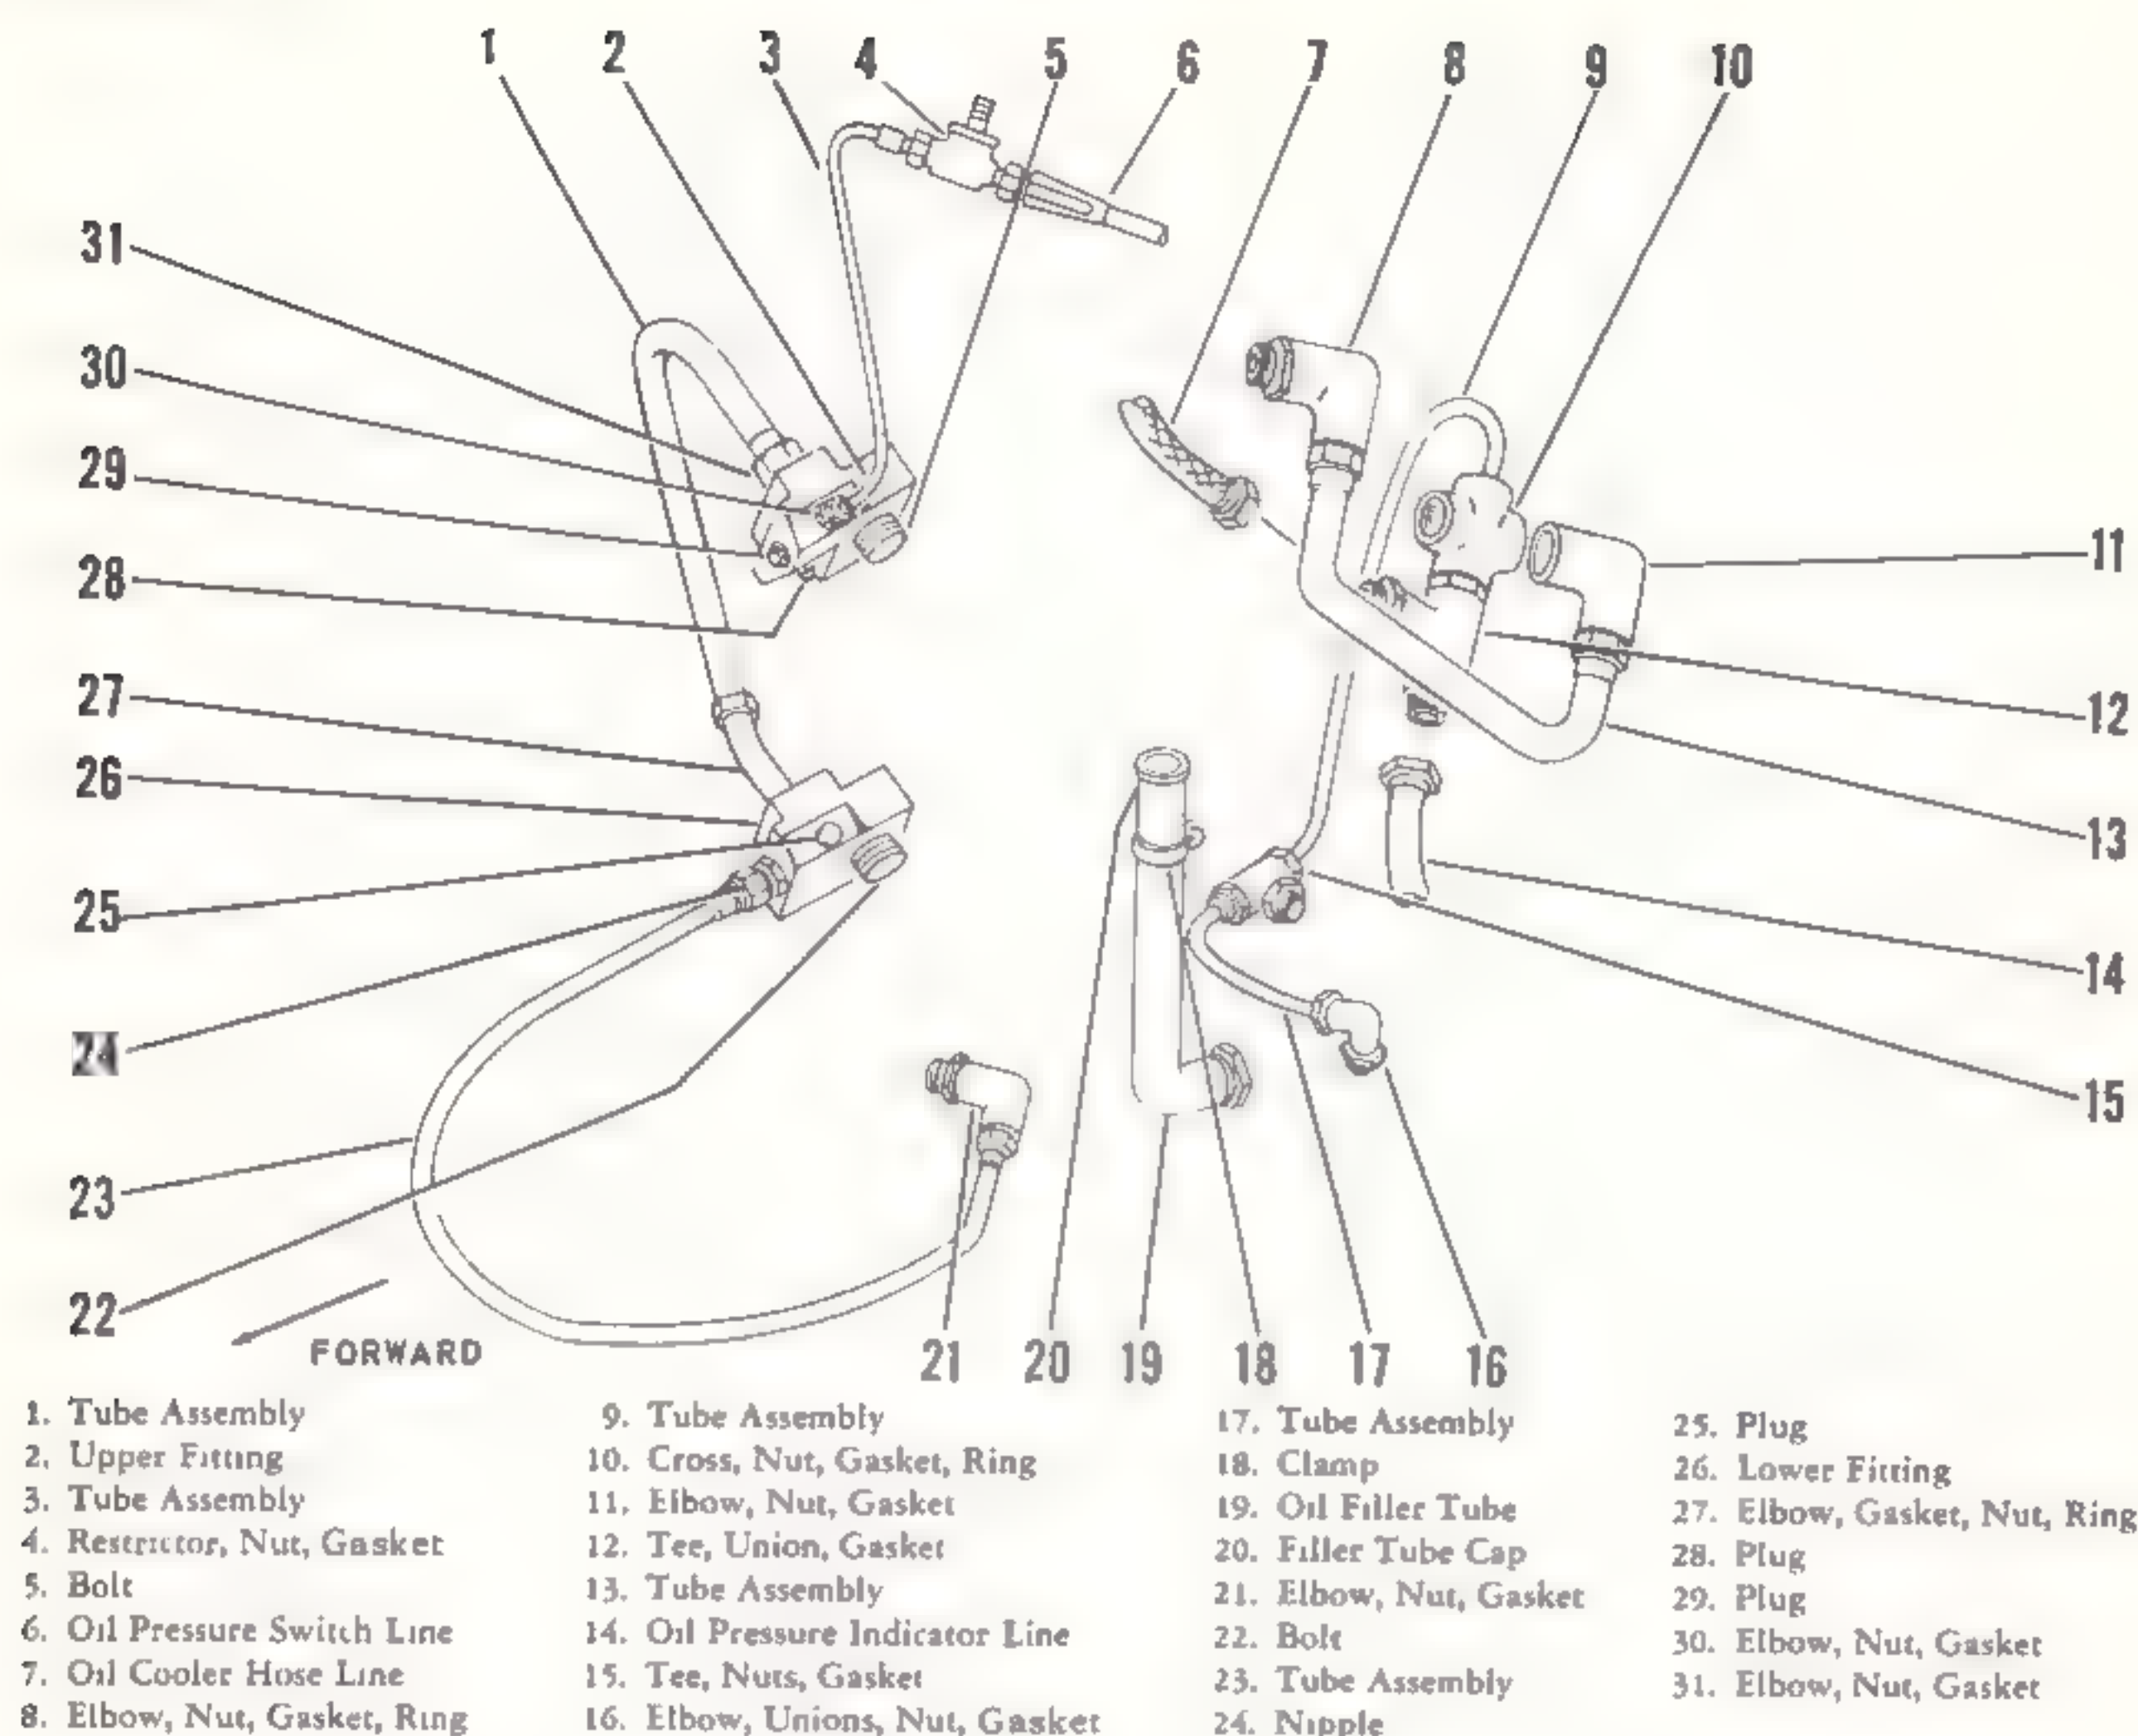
Main transmission oil separator installation (helicopters serial No. 54-2882 and subsequent)
